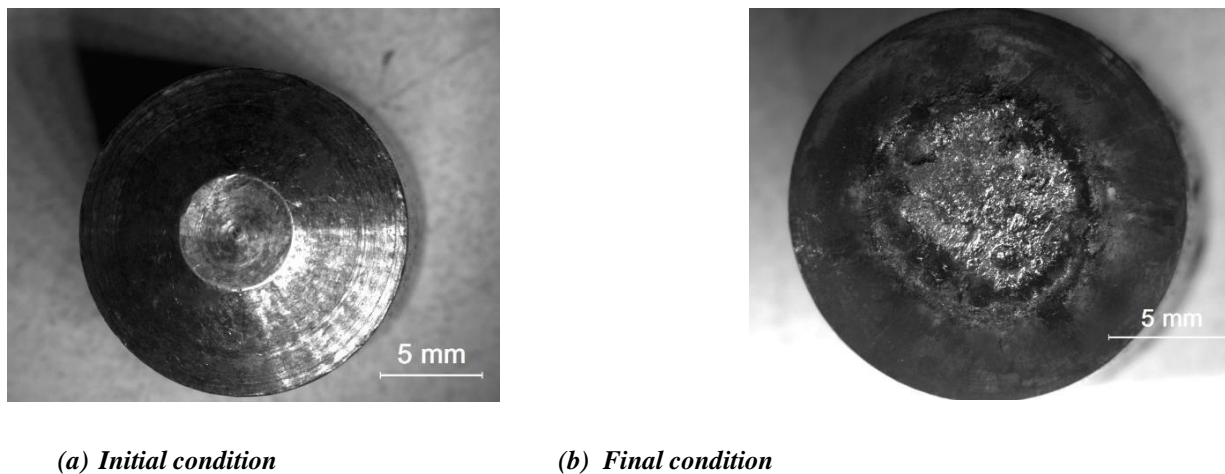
Stereo image of the electrode in (a) initial condition and (b) after 1440 number of spot welds.
